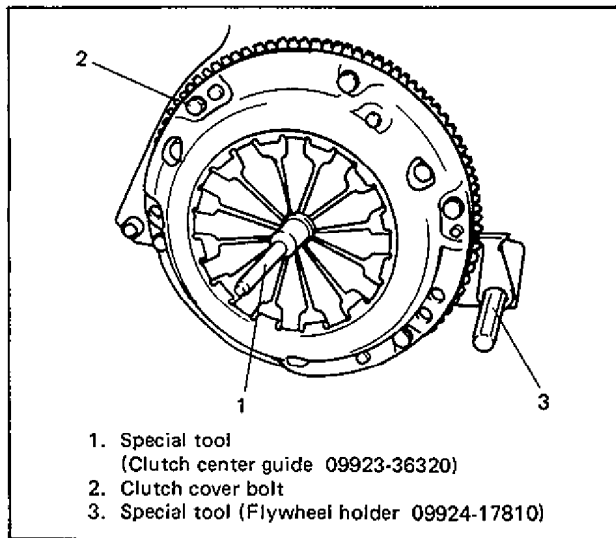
C1-10-6 Installing Clutch Disc and Cover
